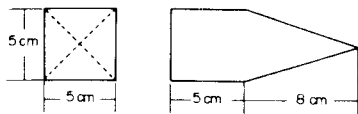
Wooden wedges installed in the anechoic water tank wall to minimize acoustic reflection from the walls.
